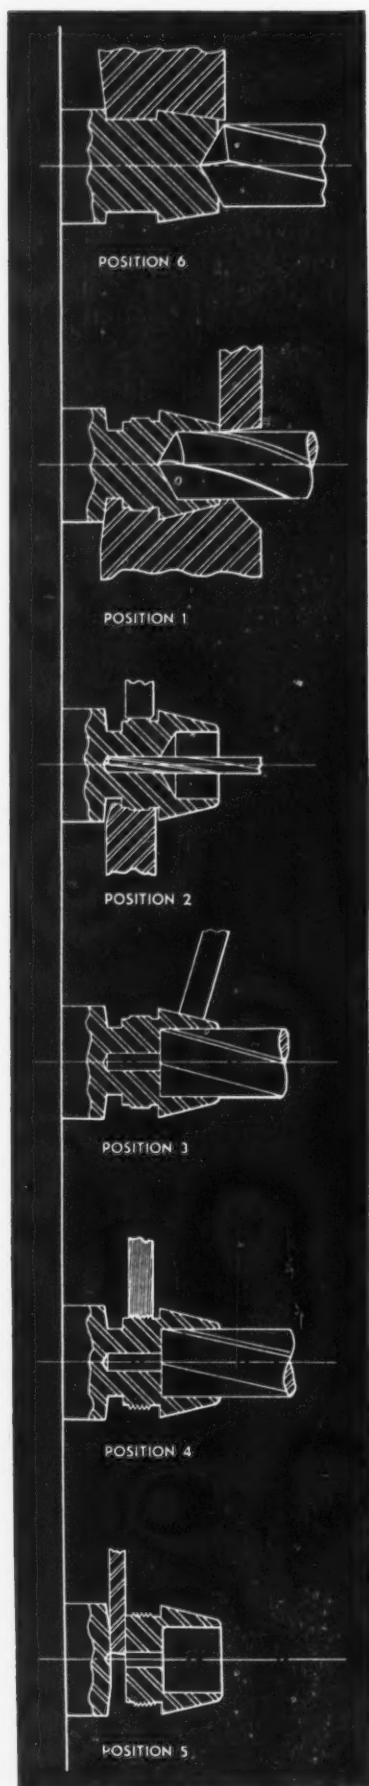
(Left) Tooling Arrangement for Making an Aluminum Fuse Head on a Six-spindle Automatic Screw Machine
